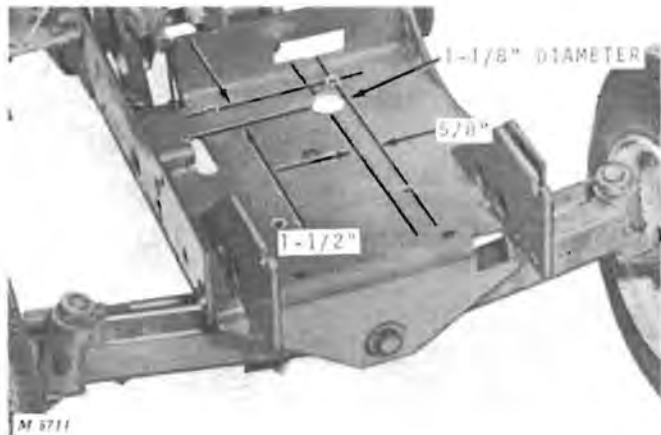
Drilling Holes in Engine Base When Installing Service Engine on 110 Tractors (3551-15000)
